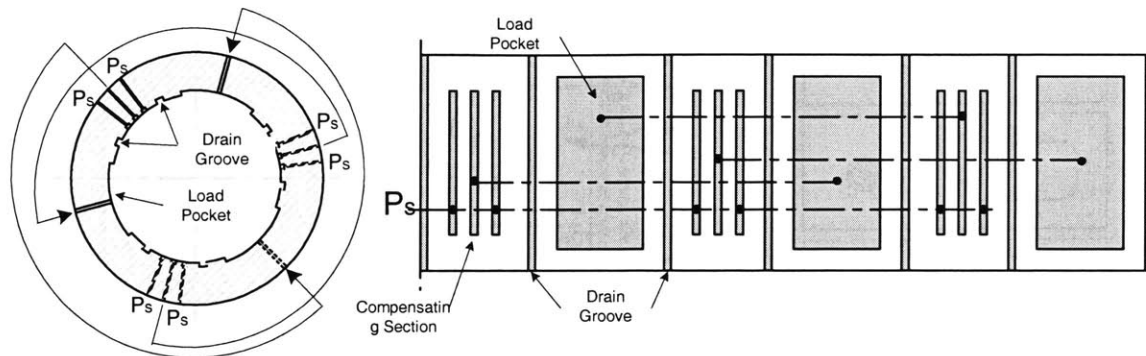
Cross sectional and developed view of surface self-compensating journal bearing
